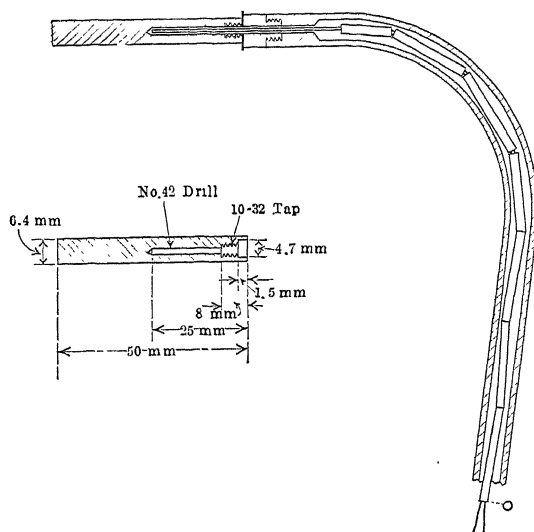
STANDARD CYLINDER AND THERMOCOUPLE.
